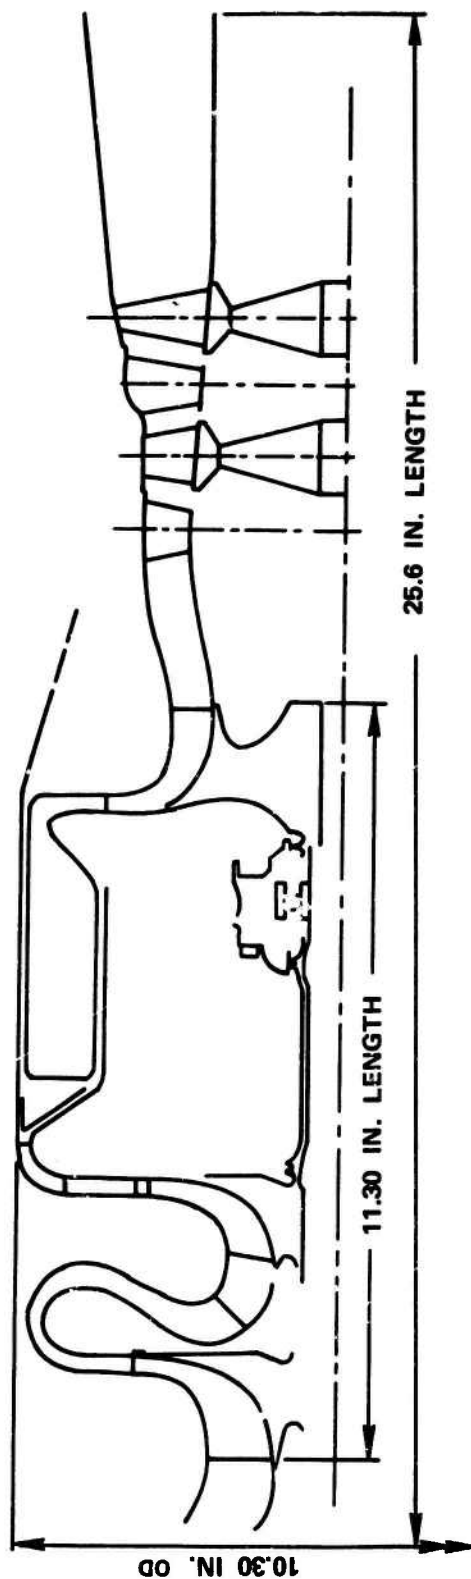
Turboshaft Engine Schematic With Two-Stage Centrifugal Compressor, Straight-Through Annular Combustor, and Radial Turbine.
